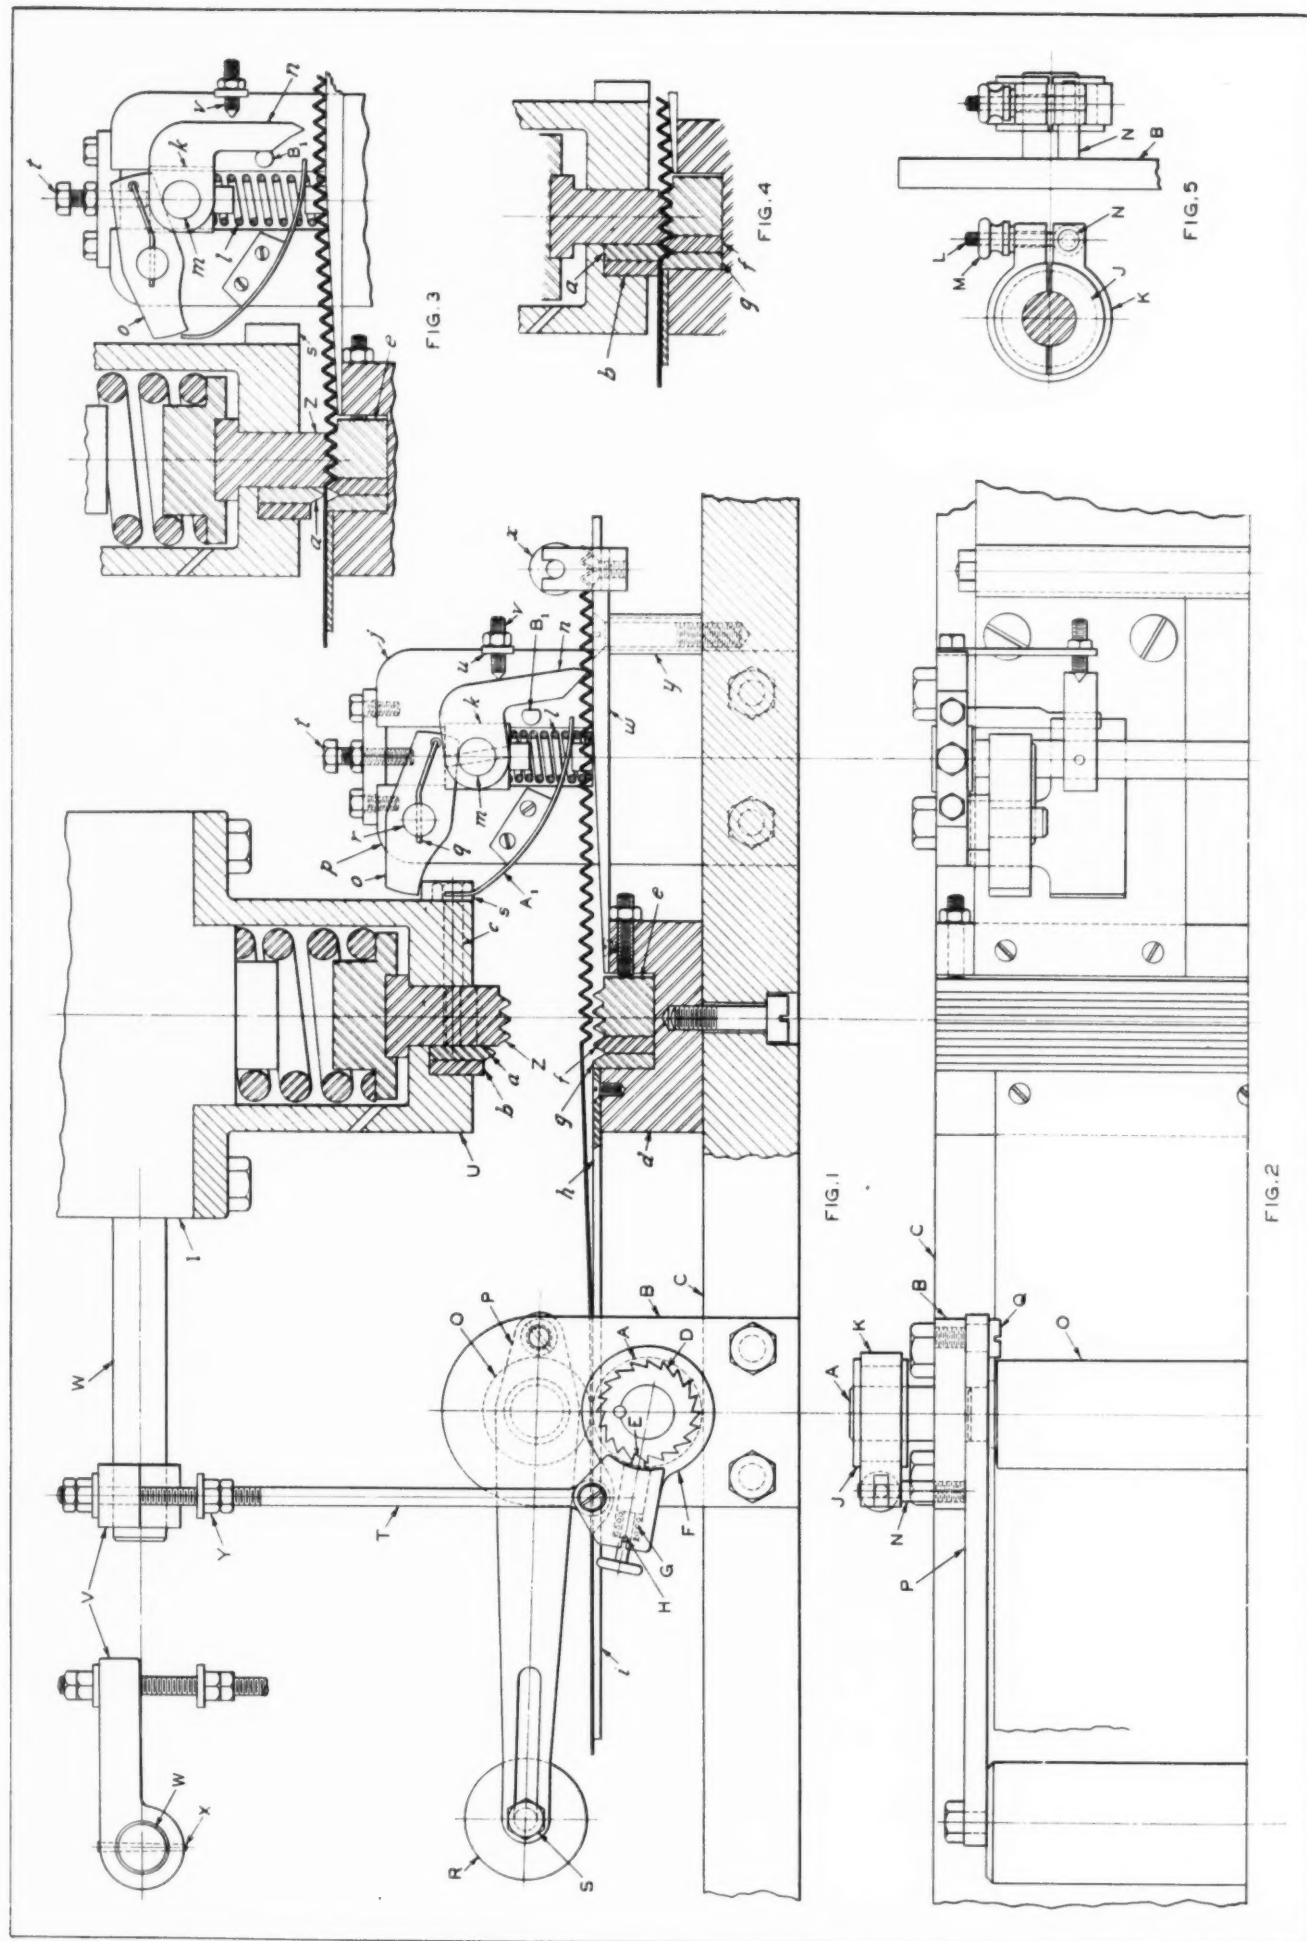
Ratchet Feed Die Used on Press Brake for Continuous Corrugating of Thin Sheet Metal. Fig. 2. Plan View of Half of Lower Member of Die Shown in Fig. 1. Fig. 3. Punch Z and Die e Holding Work to be Formed by Punch a. Fig. 4. Punch a at End of Forming Stroke. Fig. 5. Brake Assembly for Controlling Roll A
